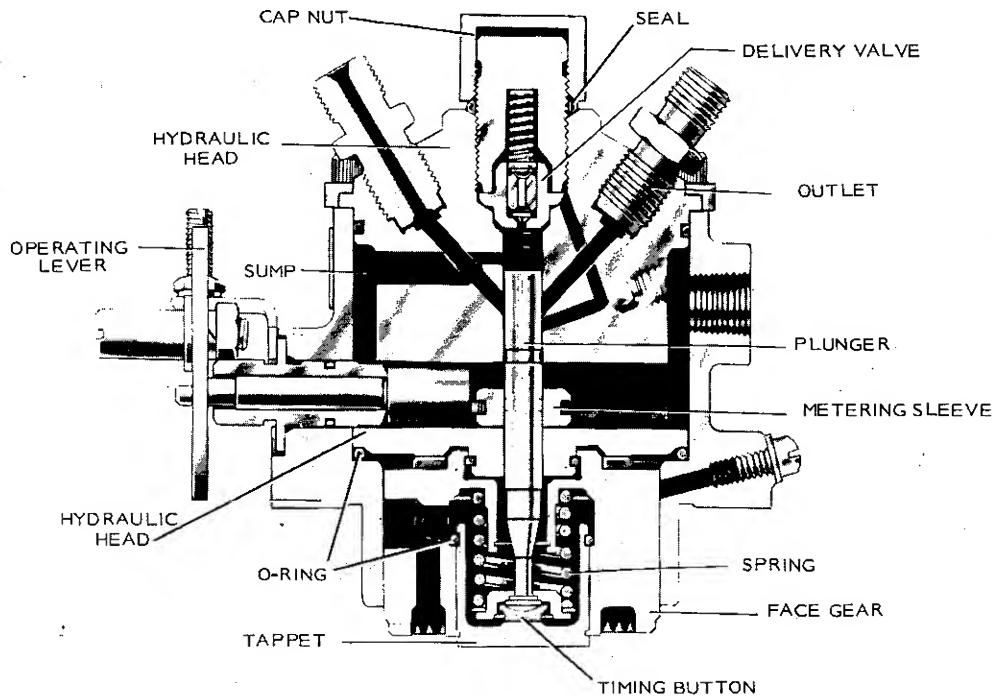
PSU PUMP (CUTAWAY VIEW)
